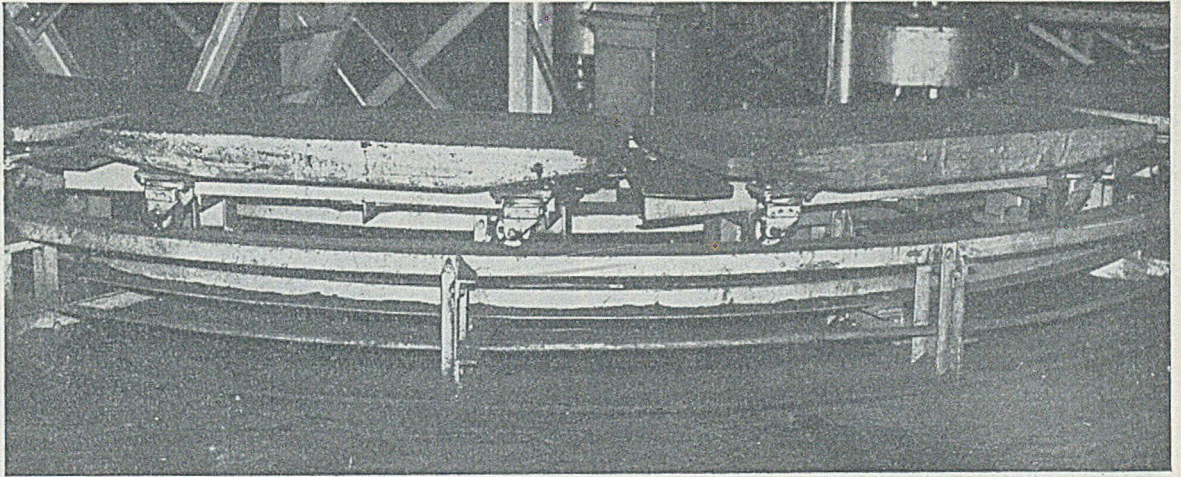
Corner on the Power-driven Mould Conveyor. The Pallets have a Side Skirt to counteract warp-
